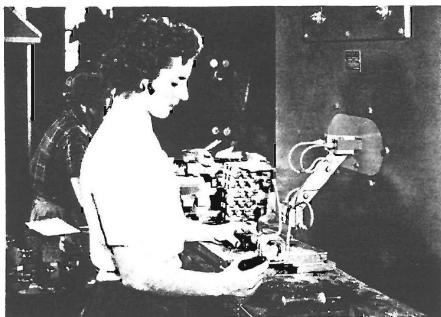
Carbide tool tipping at 530 kc. (*Metro Tool and Gage Co.*)
